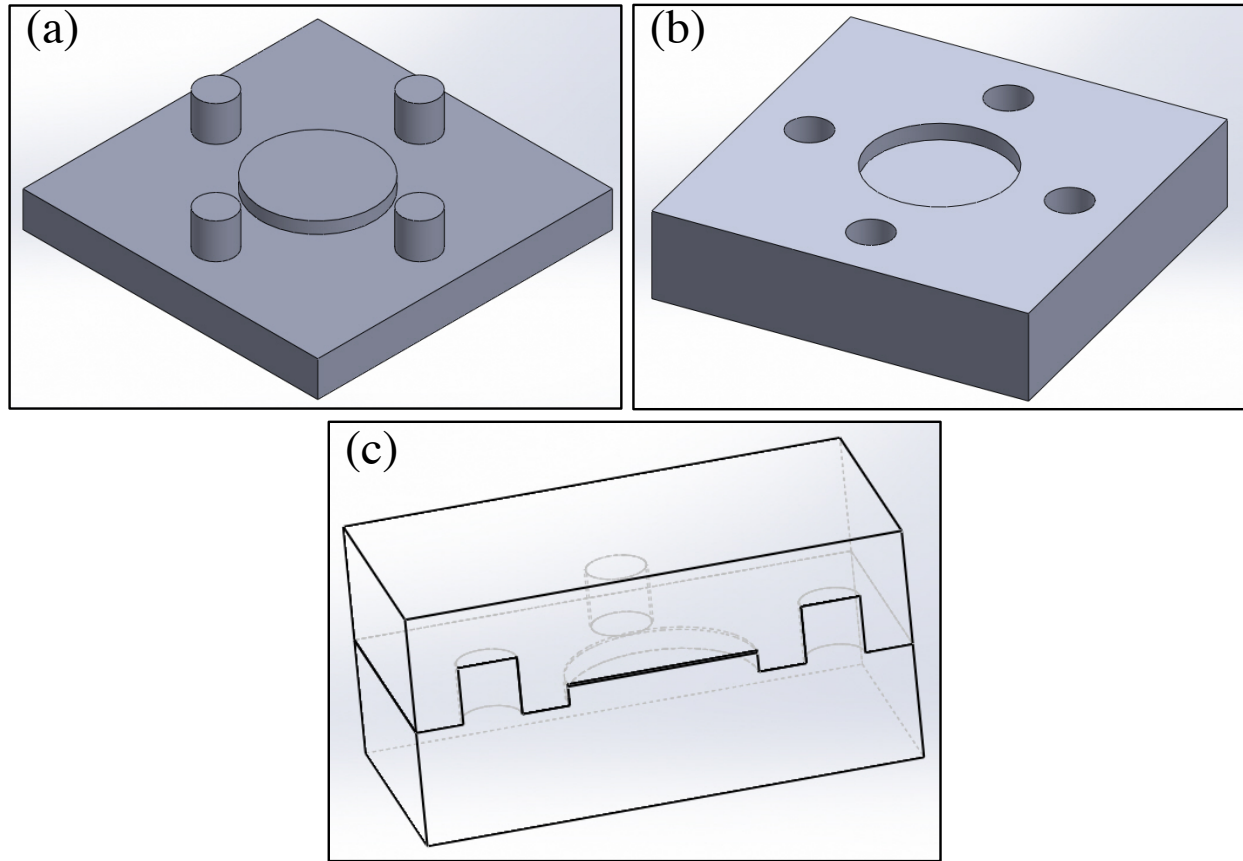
CAD design of (a) Male part with extrusions (b) Female part with holes (c) Section view of the assembly
